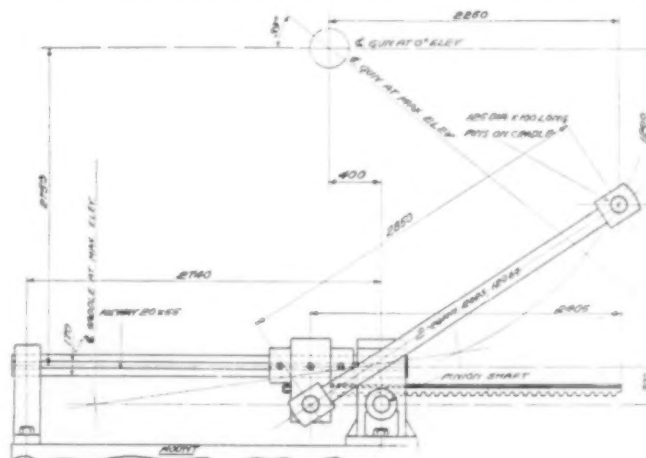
ELEVATING MECHANISM (ELEVATION) OF GERMAN 305-MM. MOUNT, BATTERY KAISER WILHELM II
